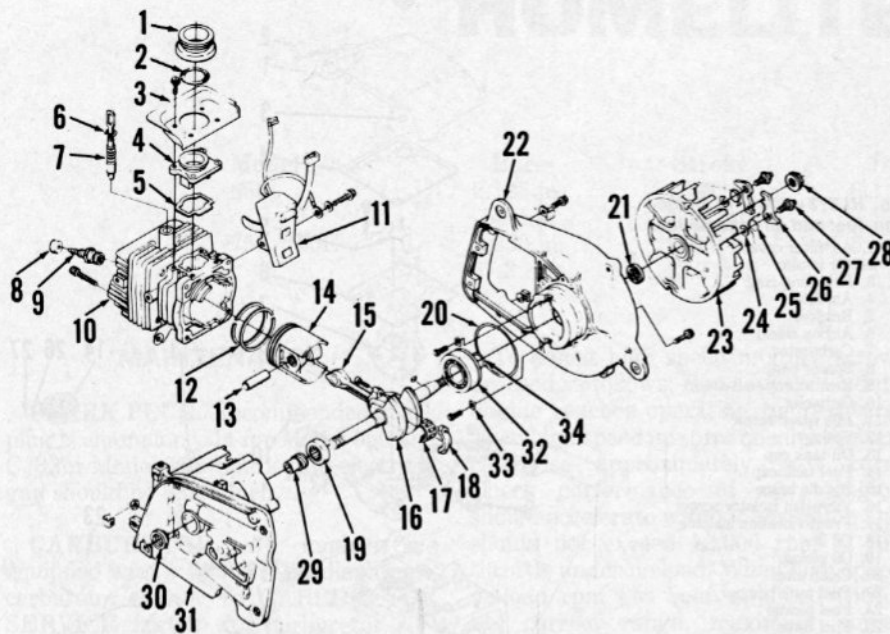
Exploded view of Model 750 and 750E engine. Model 650 is similar except second roller bearing (19) is used in place of components (32, 33 and 34).
